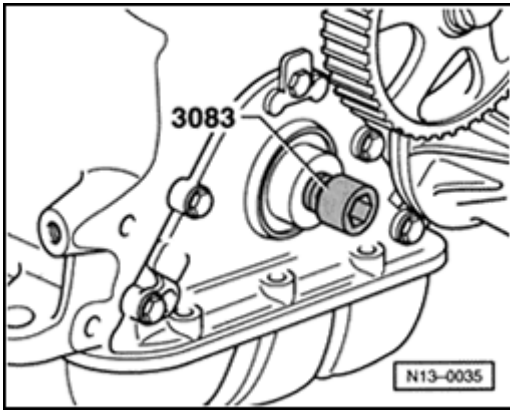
Screwing Phillips-Head Bolt From 3083 Into Crankshaft
